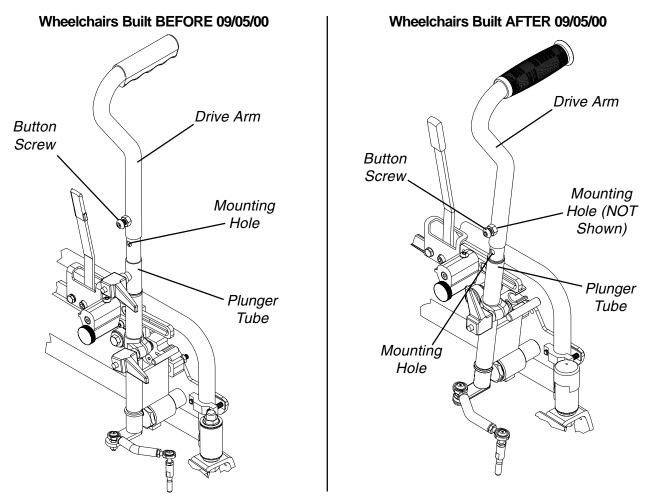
ADJUSTING DRIVE ARM HEIGHT
